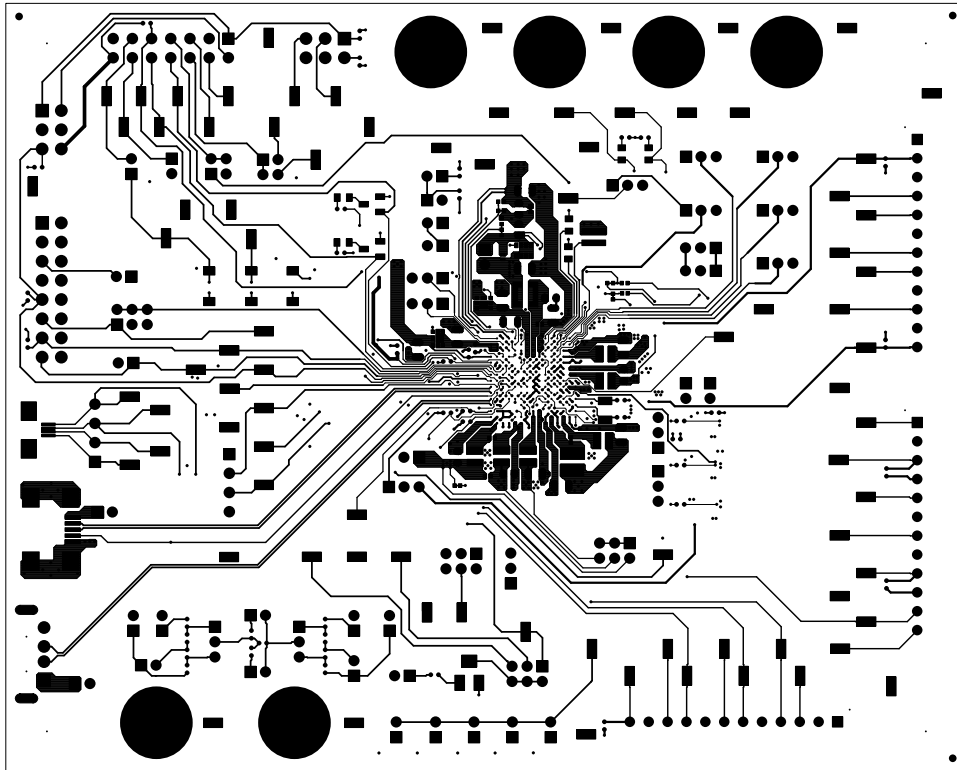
KIT34708VMEVBE (Rev. B) Top Layout Layer
